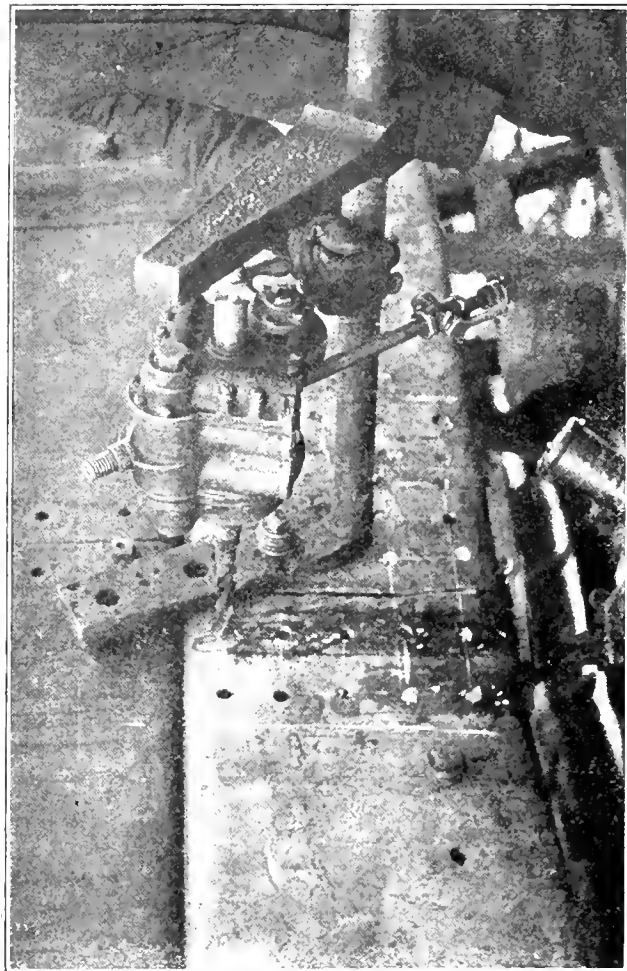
PUNCHING HOLES FOR THE SIDE SHEET WITH A PNEUMATIC DRILL.
